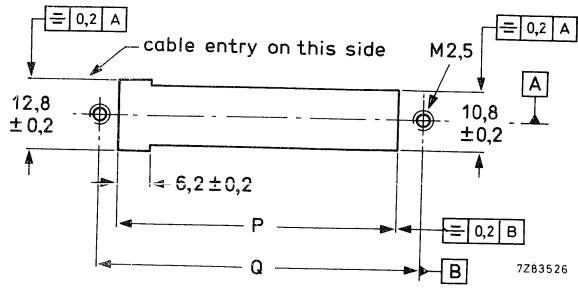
Panel cut-out for the female part; see Table 5 for dimensions P and Q.
